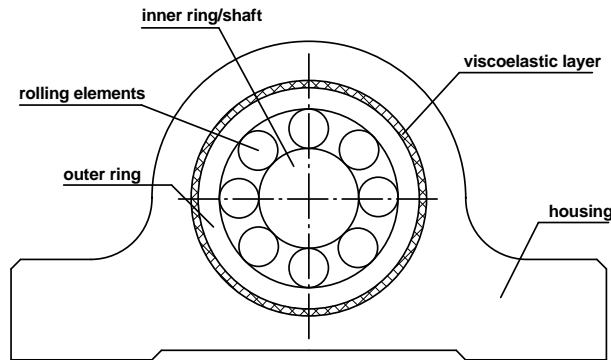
A viscoelastic layer mounted between the bearing outer ring and the housing.
